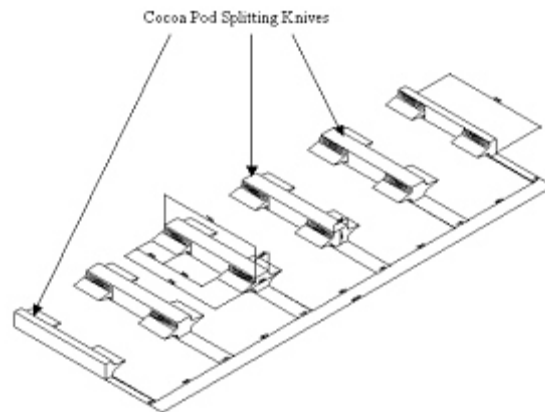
Array of Cocoa Pod splitting knives (with dimensions)
